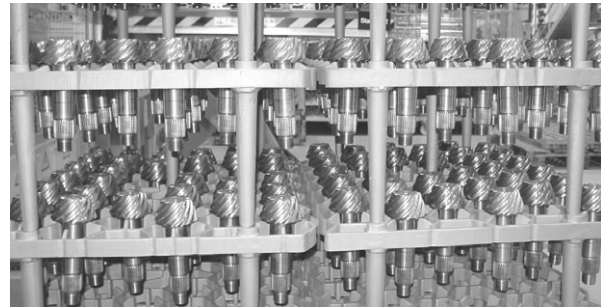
Fully automated 8-chamber ModulTherm® for vacuum carburizing and gas quenching of bevel gear pinions (BMW Group).
